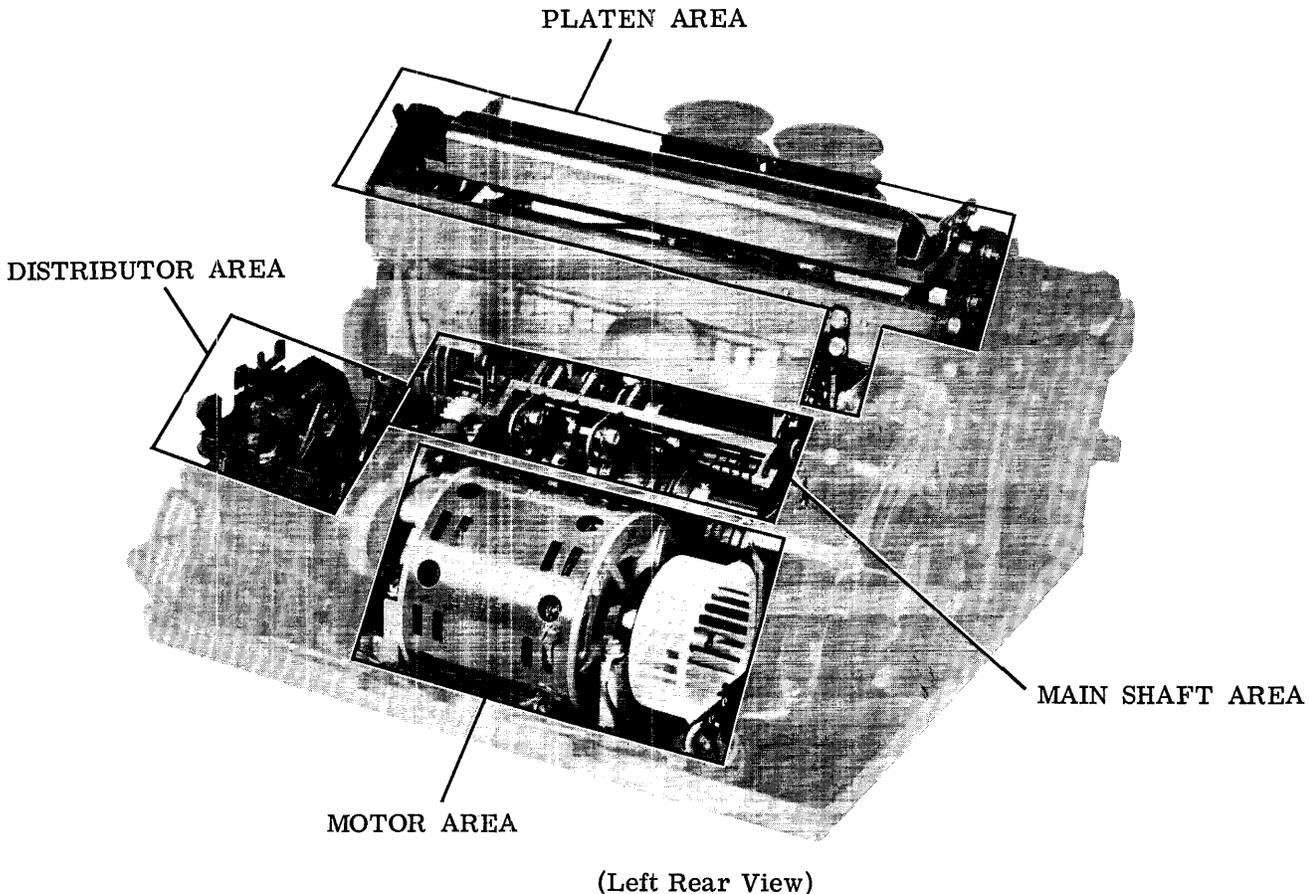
Distributor, Main Shaft, Motor, and Platen Areas
